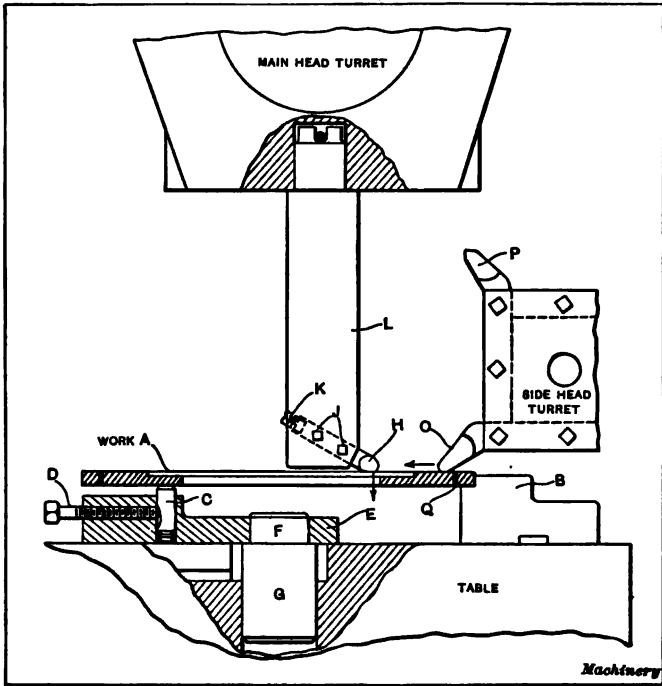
Machining Steel Sprocket for Automobile Trucks
